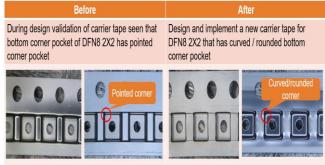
Distinguish the tool used in DFN8 2X2 and other package type
